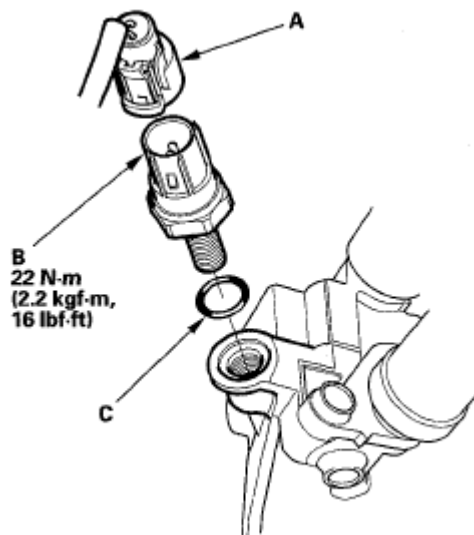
Identifying Rocker Arm Oil Pressure Switch With Torque Specifications
